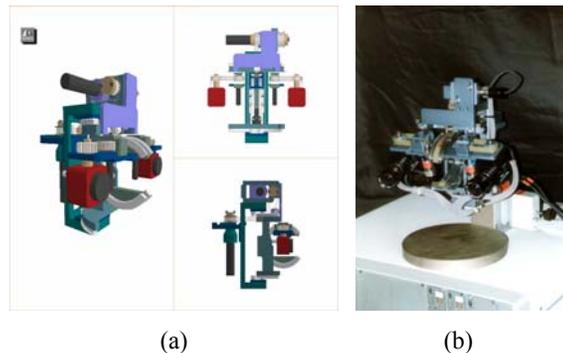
The Euro-Head: (a) Mechanical design and (b) implementation
